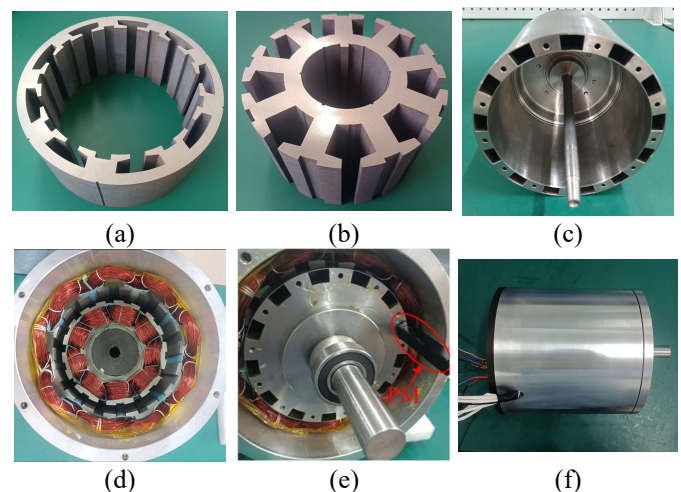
Main components of the prototype. (a) Outer stator core. (b) Inner stator core. (c) Rotor shell. (d) Stator assembly. (e) Stator and rotor assembly. (f) Prototype.
